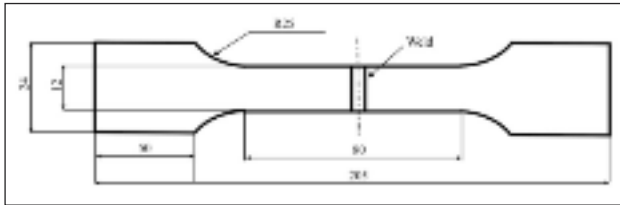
Geometry of tensile test specimens used in the this study (dimensions are in mm).
